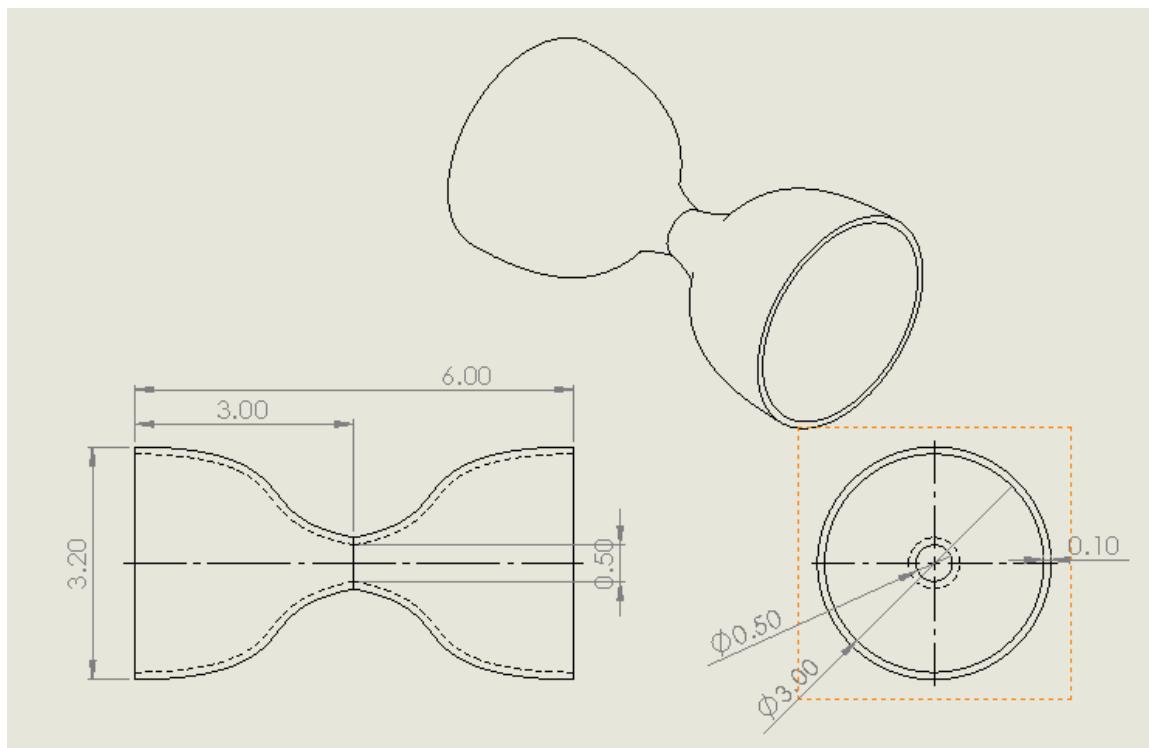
Solidworks Drawing of Model One-2(unit - inch)
